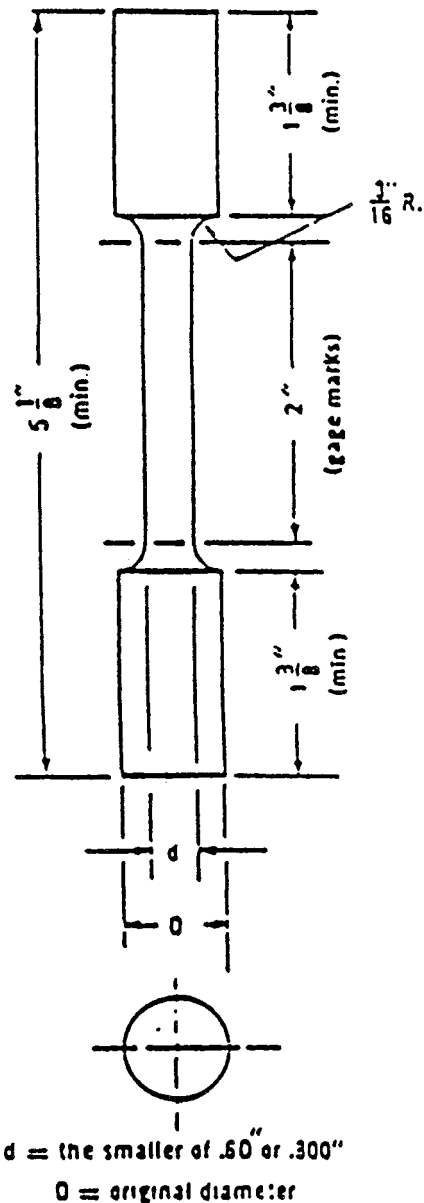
Turned Dumbbell Specimen for Tensile Testing
